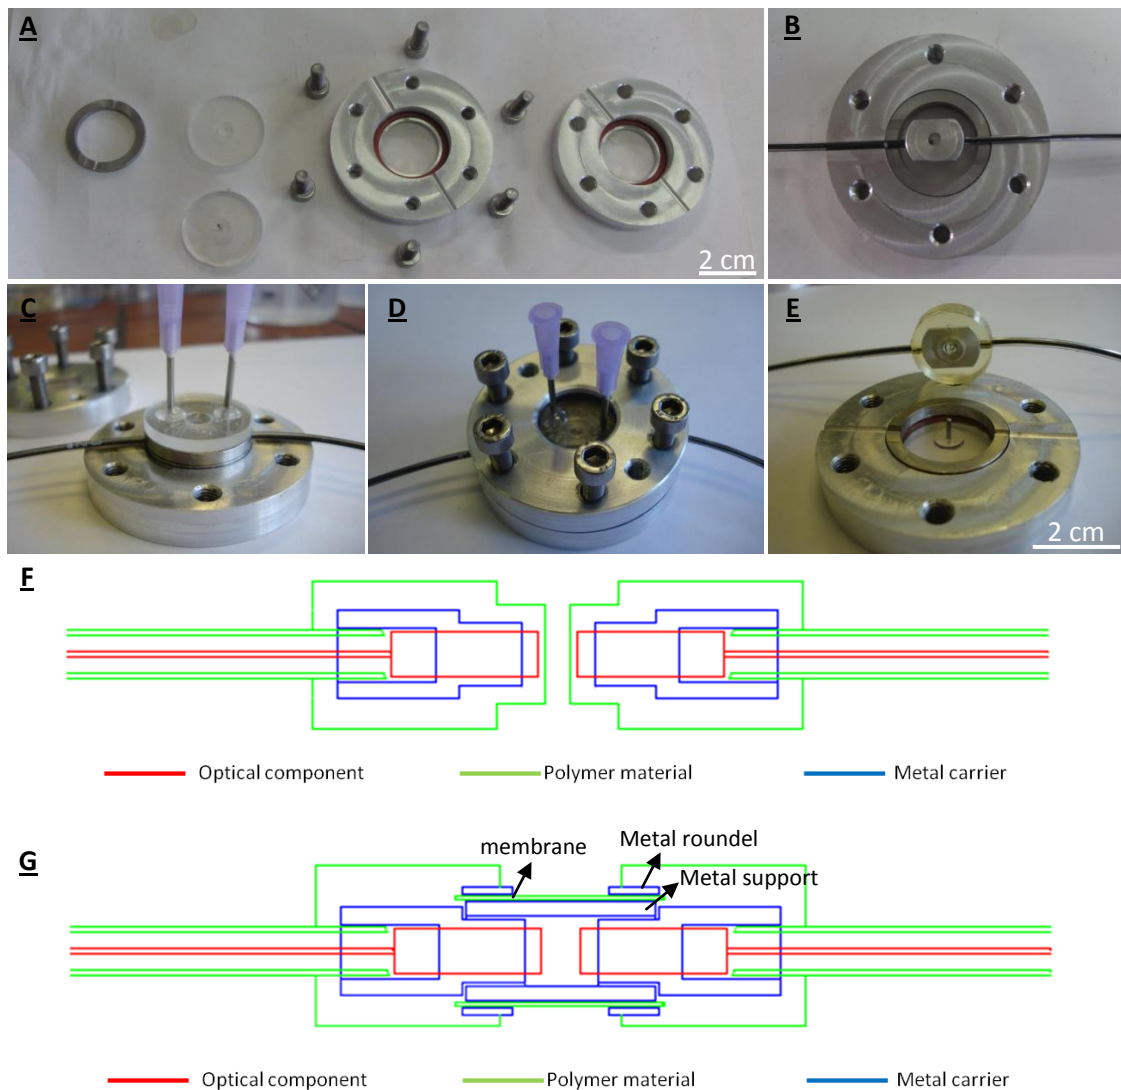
Assembly of a UV-transparent mold for the production of a donut-shaped polymer packaging, incorporating optical fibers (A-E). A cross-section of the embedded fiber construct (mold design 2) is also shown (F). Mold design 3 is identical to design 2, except for the use of PES membranes which cover the central cavity (mold design 3) (G). In this case, a metal roundel and metal perforated support were used respectively above and under the membrane as mechanical support.
